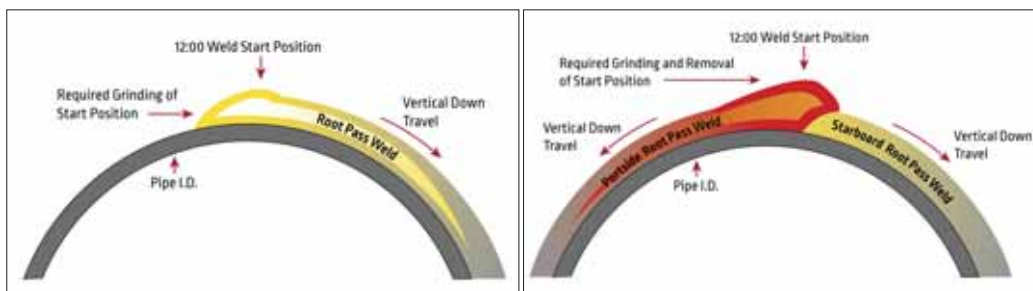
Left: typical starboard side weld starting routine and resulting weld topography requiring secondary grinding process. Right: typical port side weld starting routine beginning at manually ground starboard weld – resulting topography requires a manual grinding process before subsequent passes can be made.
